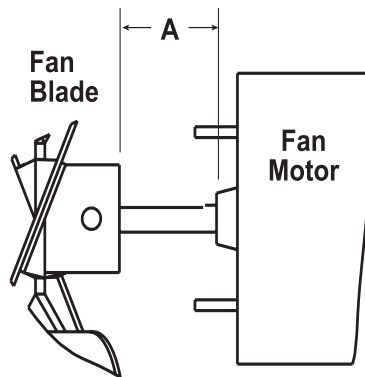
Fan and Motor Spacing (Refer to [Table 25](#))
